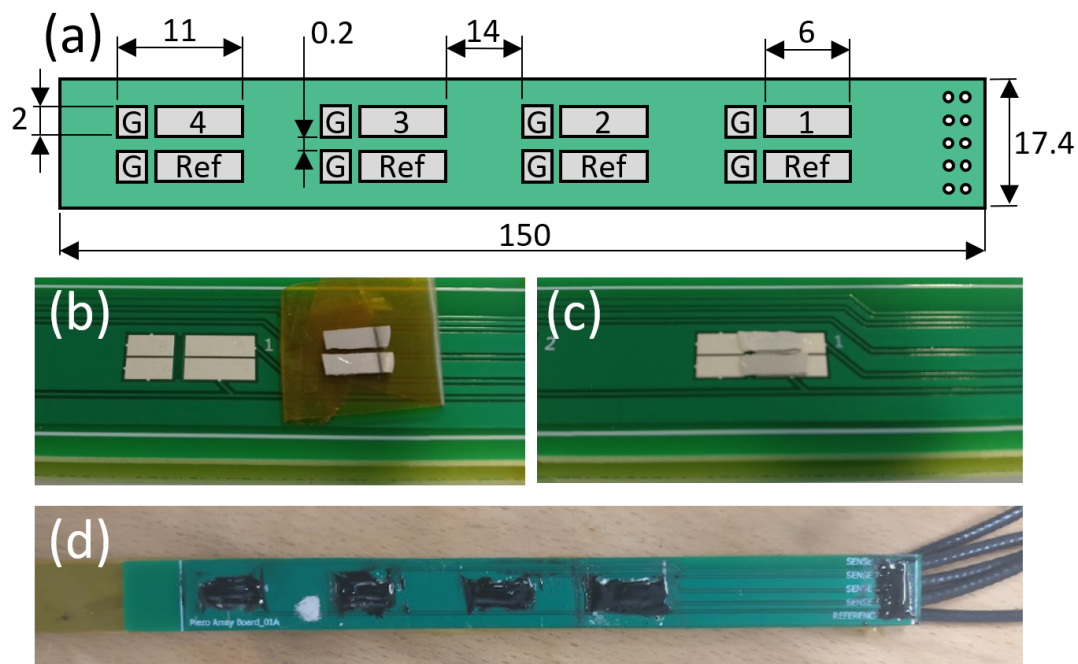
(a) Dimensioned schematic of PCB used in BETTY test platform, units in mm. (b) Piezoelectric elements positioned before silver epoxy deposition. (c) Piezoelectric elements after curing of silver epoxy. (d) Elements on PCB coated with Duralco 4525-IP adhesive before shaft installation and curing.
